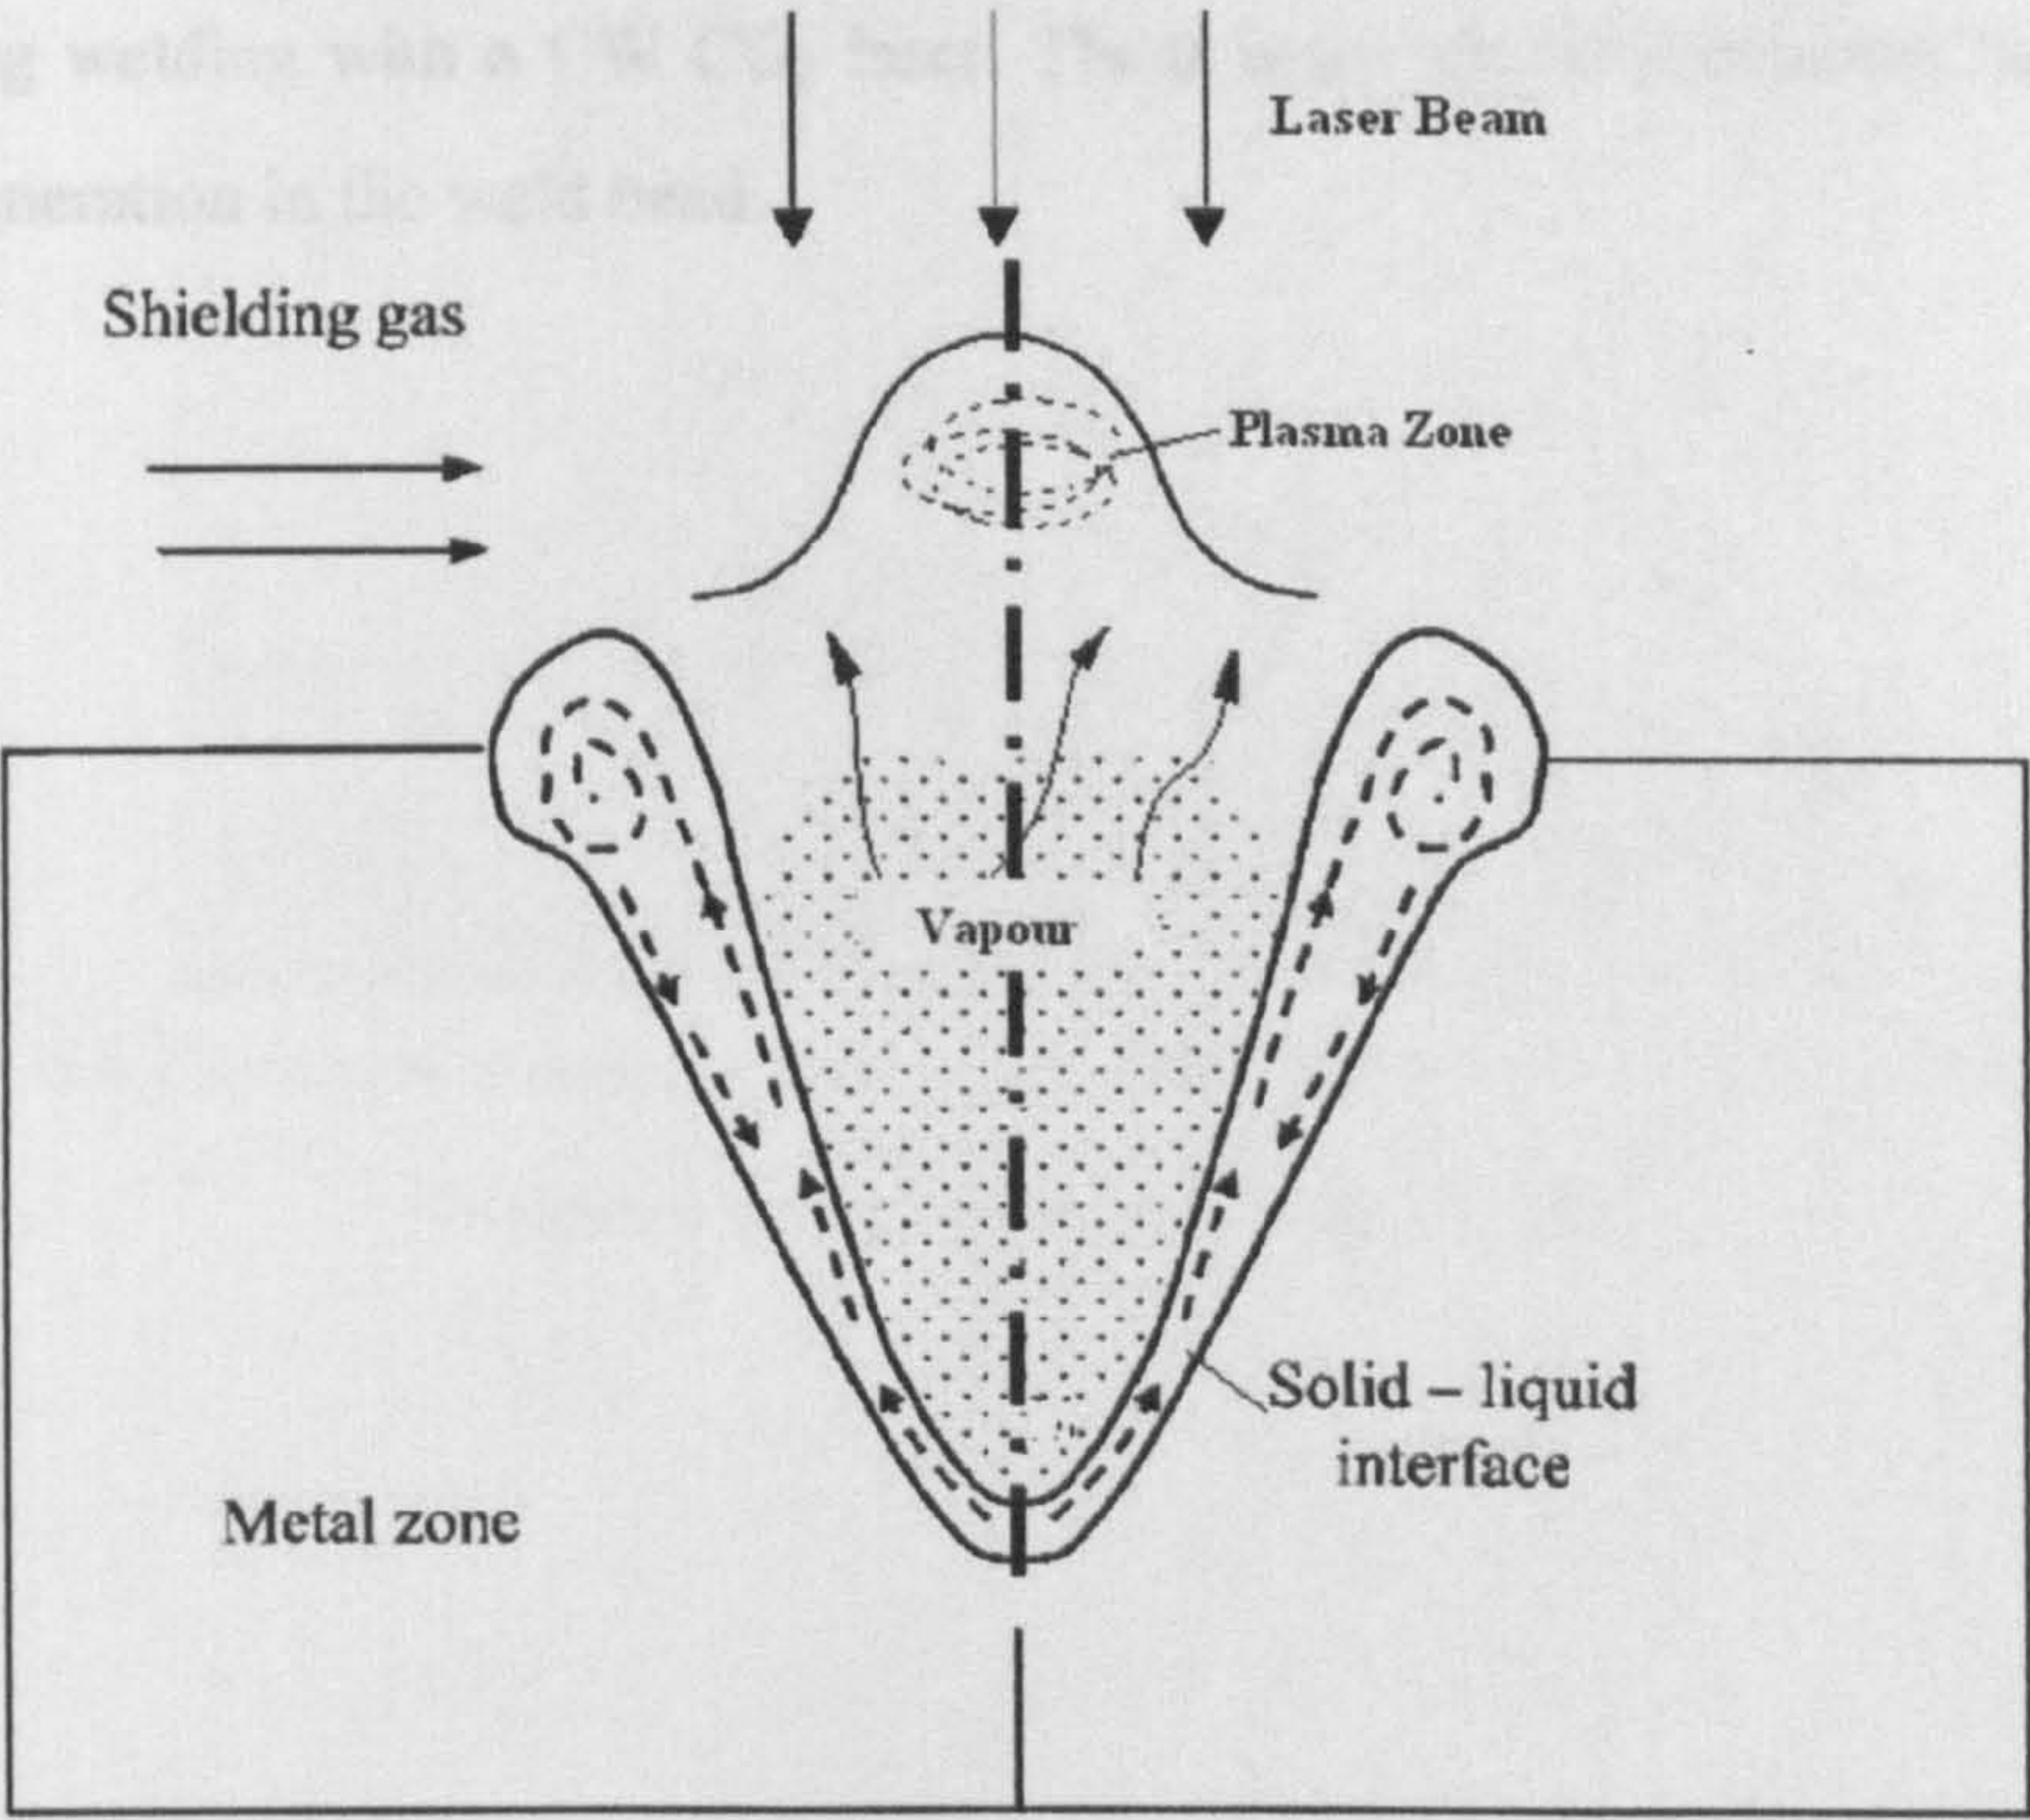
Schematic drawing of a pulsed laser welding process, modified from [13, 14]
